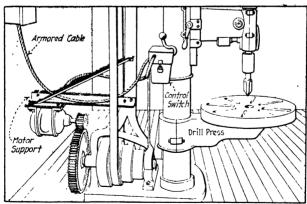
A 2-hp. motor suspended from a 15-in. drill by  $1\frac{1}{2}$  by 2-in. steel angles. (A. S. Mill, Electrical Review and Industrial Engineer, p. 119, March, 1922.)
